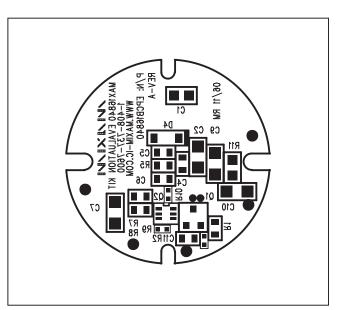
MAX16840 EV Kit Component Placement Guide— Solder Side
